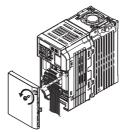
Remove the Front Cover on an IP20/Open-Chassis Drive
